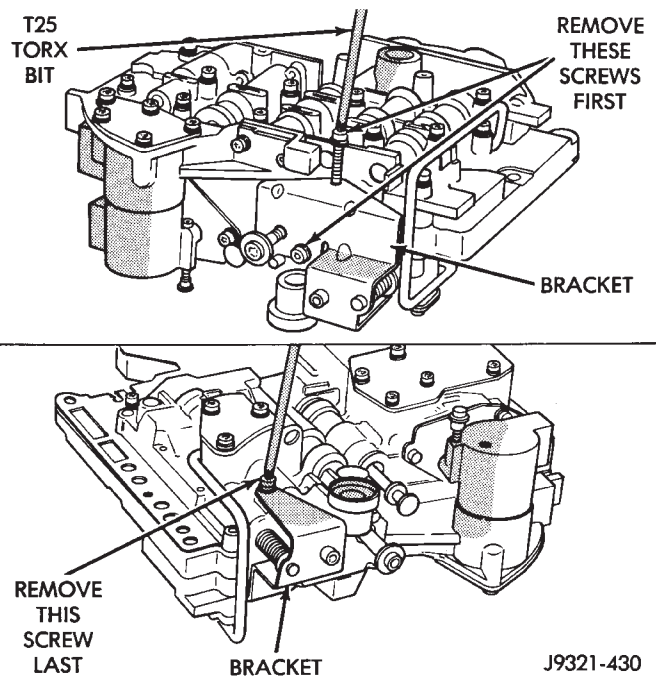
Removing/Installing Adjusting Screw Bracket Fasteners
